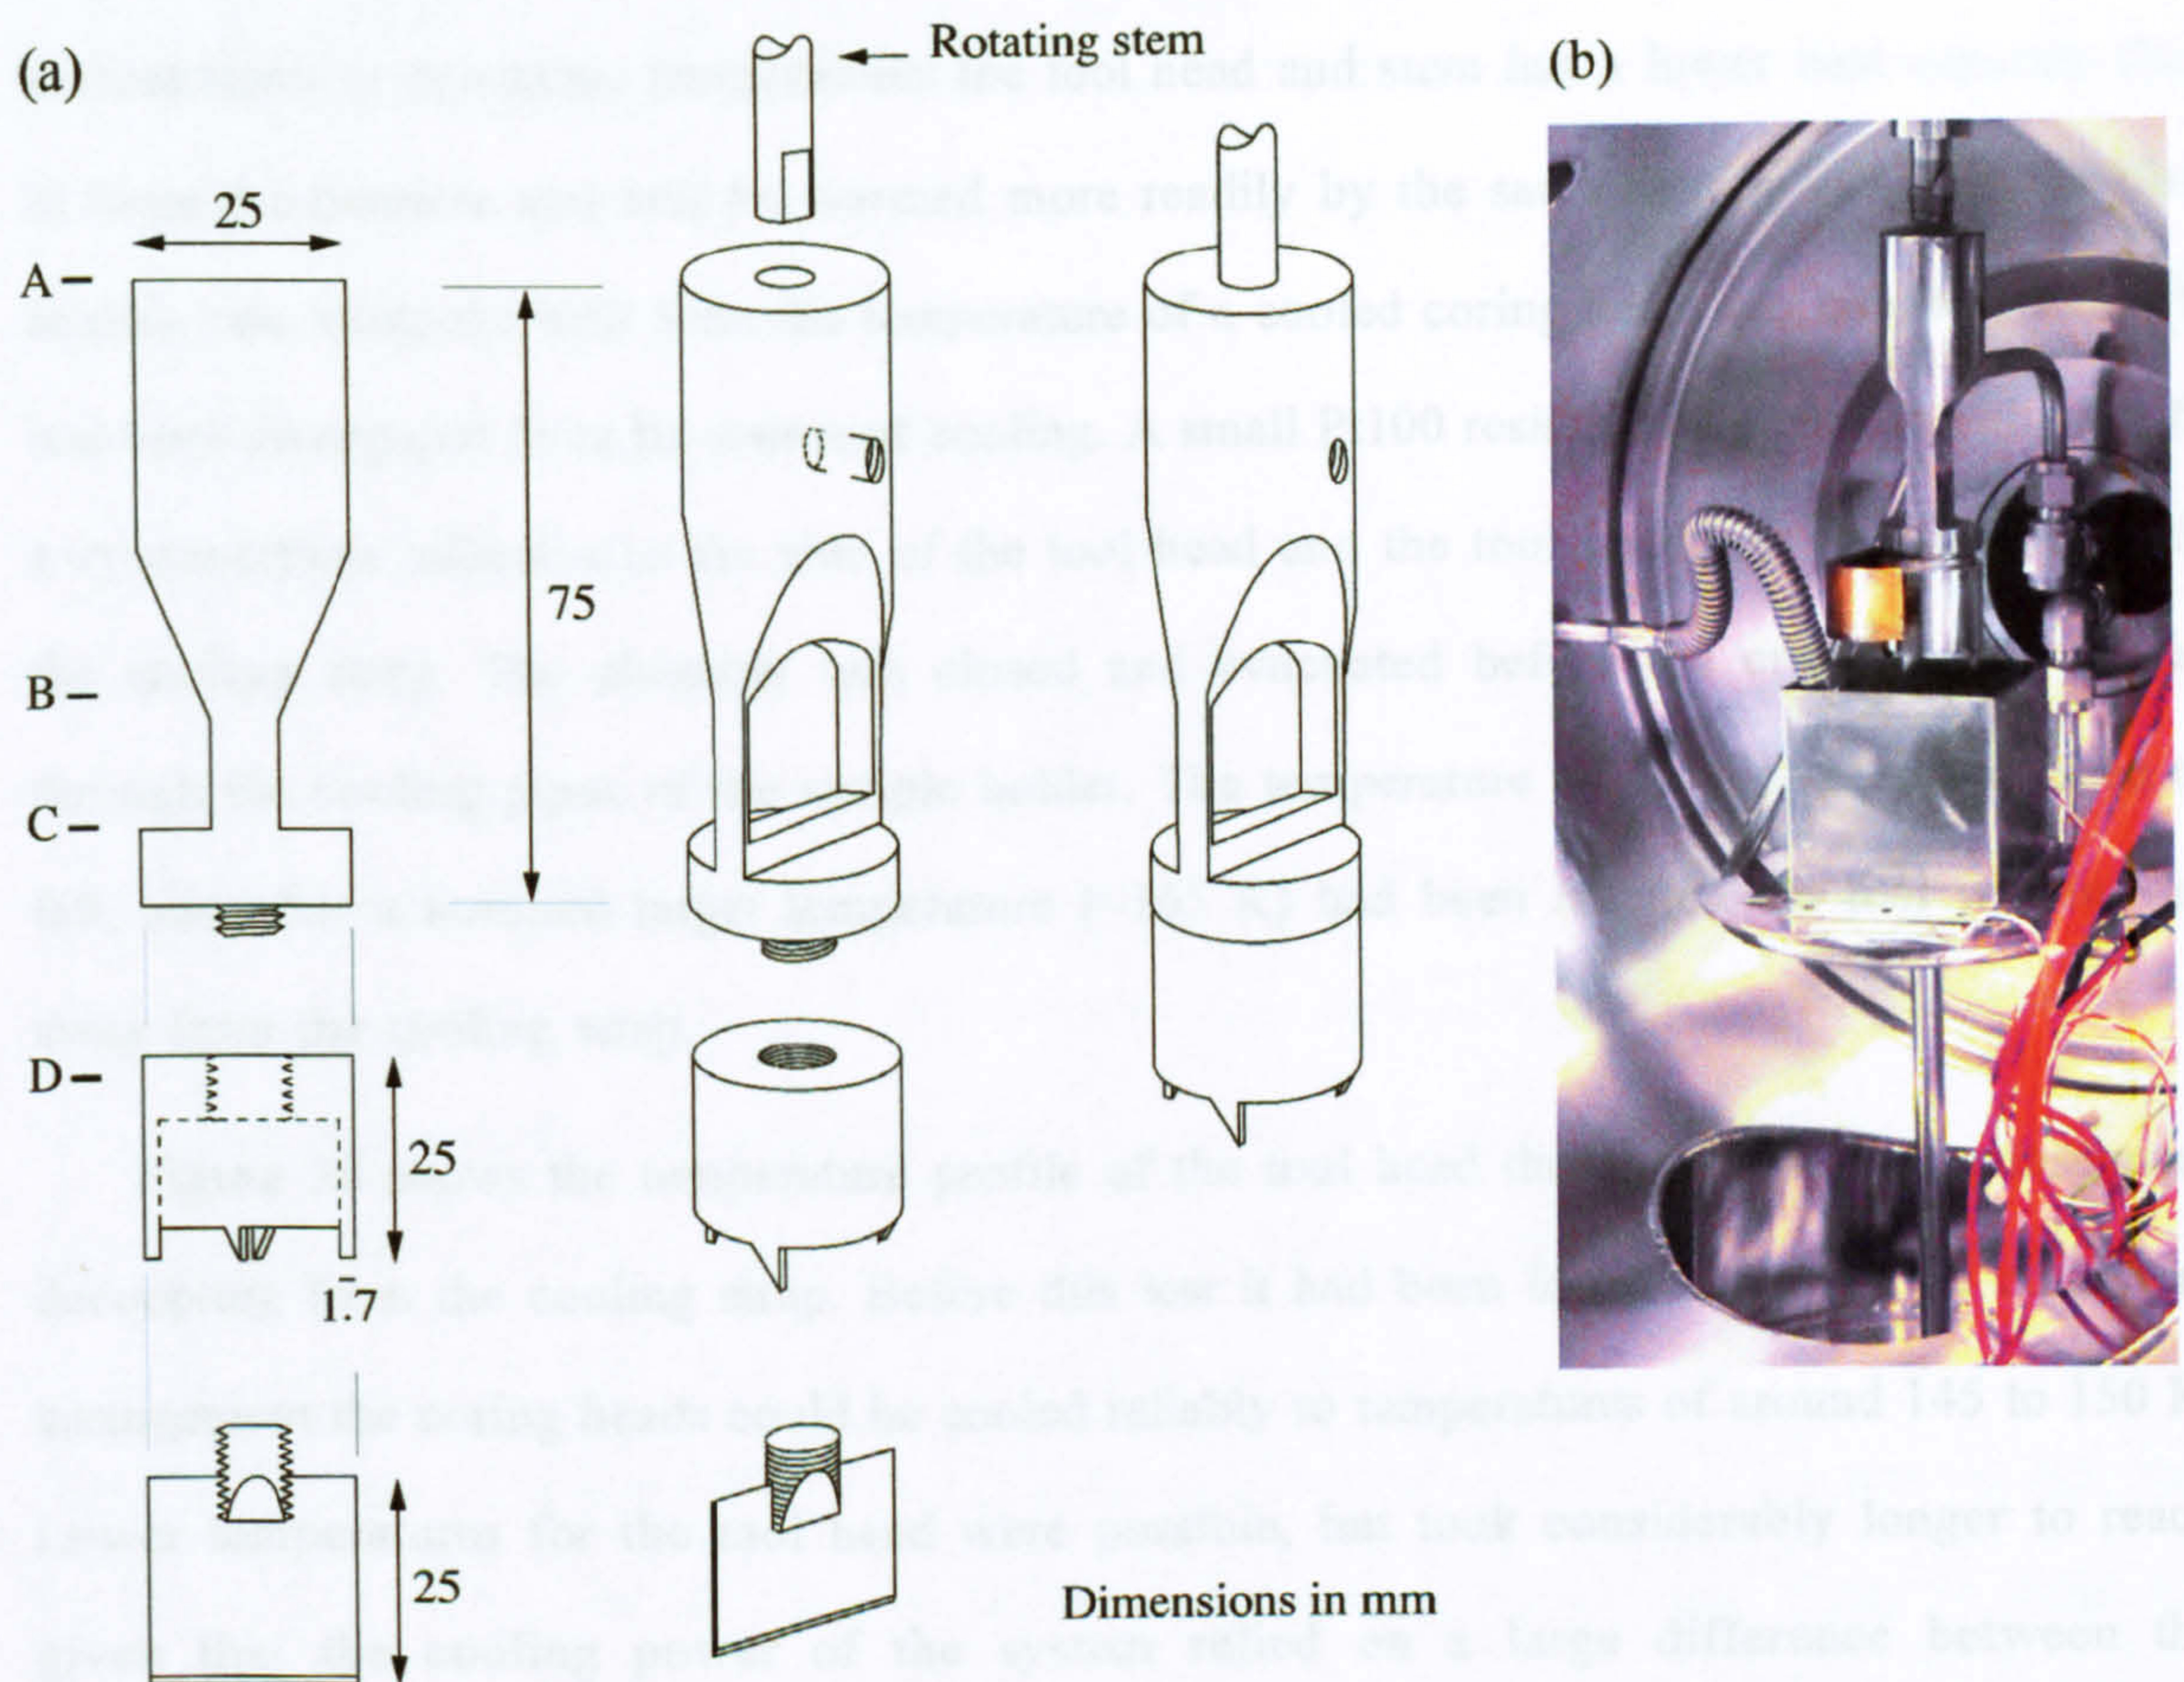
/b — Diagrams (a) and a photograph (b) of the tool holder and the tool heads used to probe icy materials. The markers A,B,C, and D indicate points where the temperature will be estimated using a one-dimensional conduction model.
